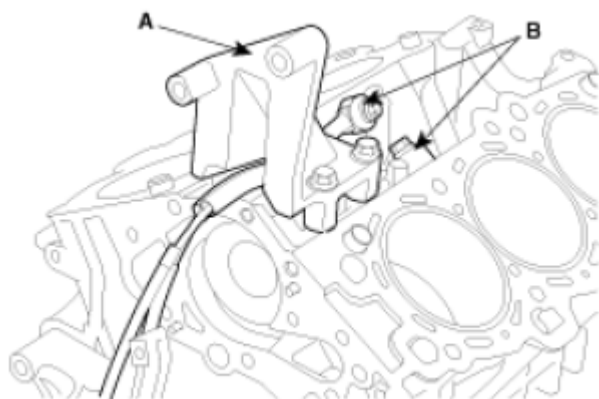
Identifying Power Steering Pump Bracket And Knock Sensor
